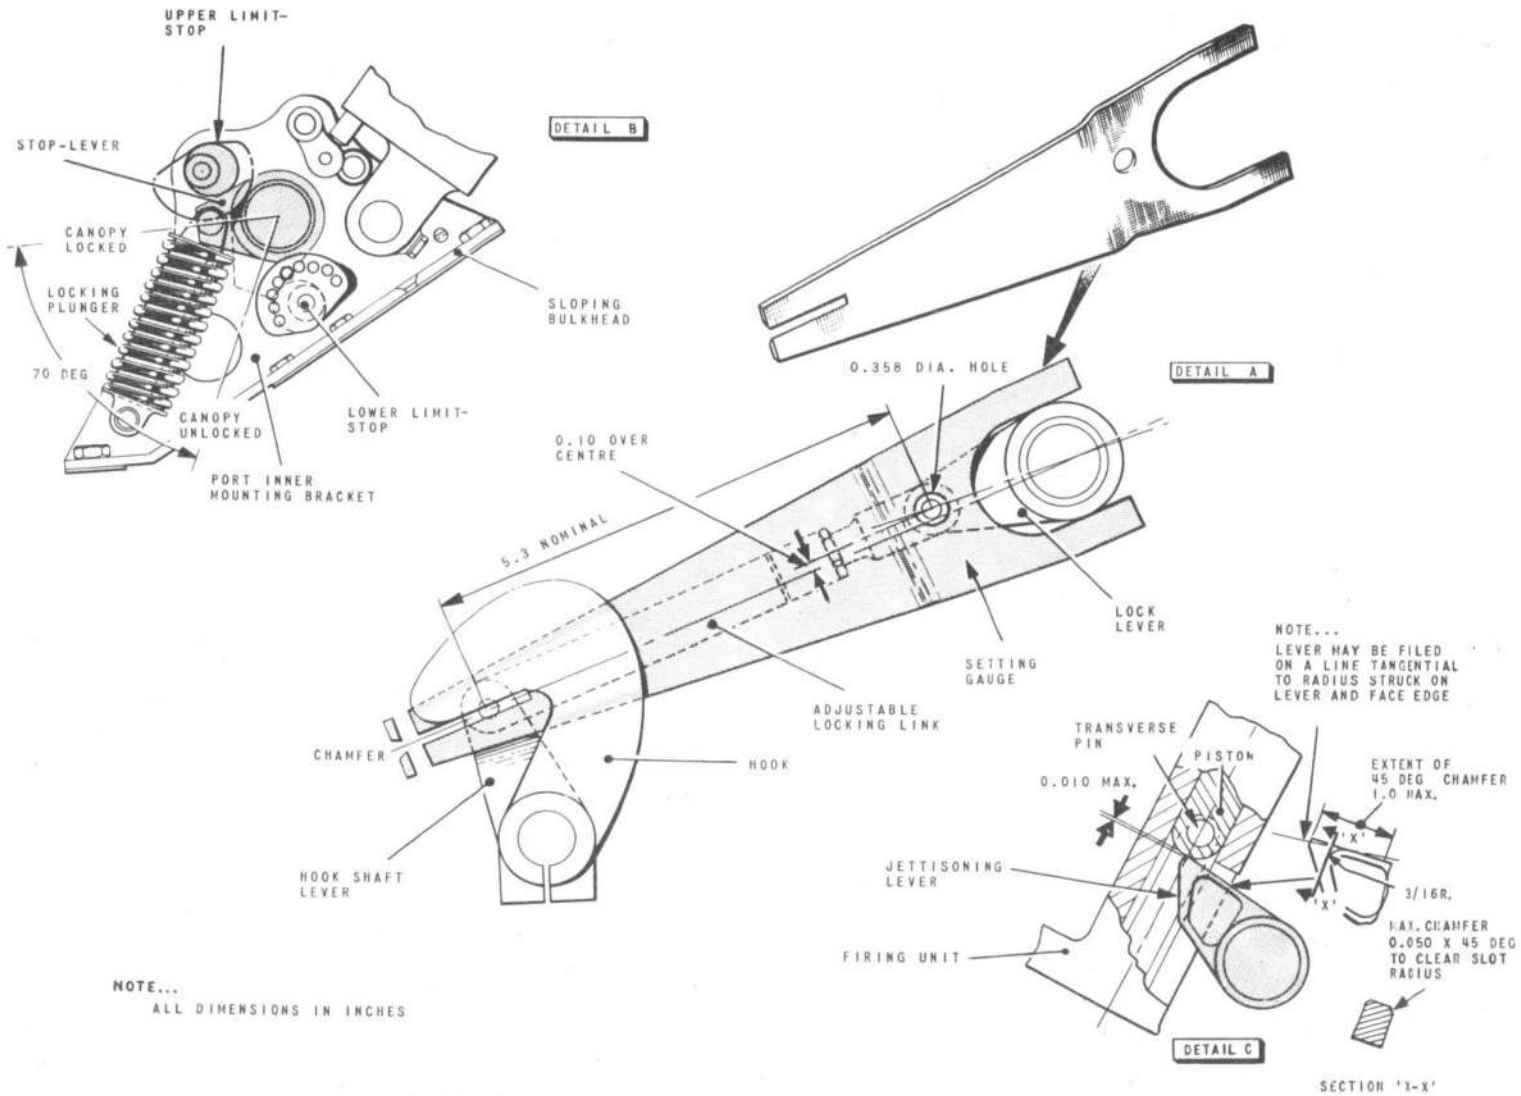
SETTING TORQUE - SHAFT LIMIT STOPS
